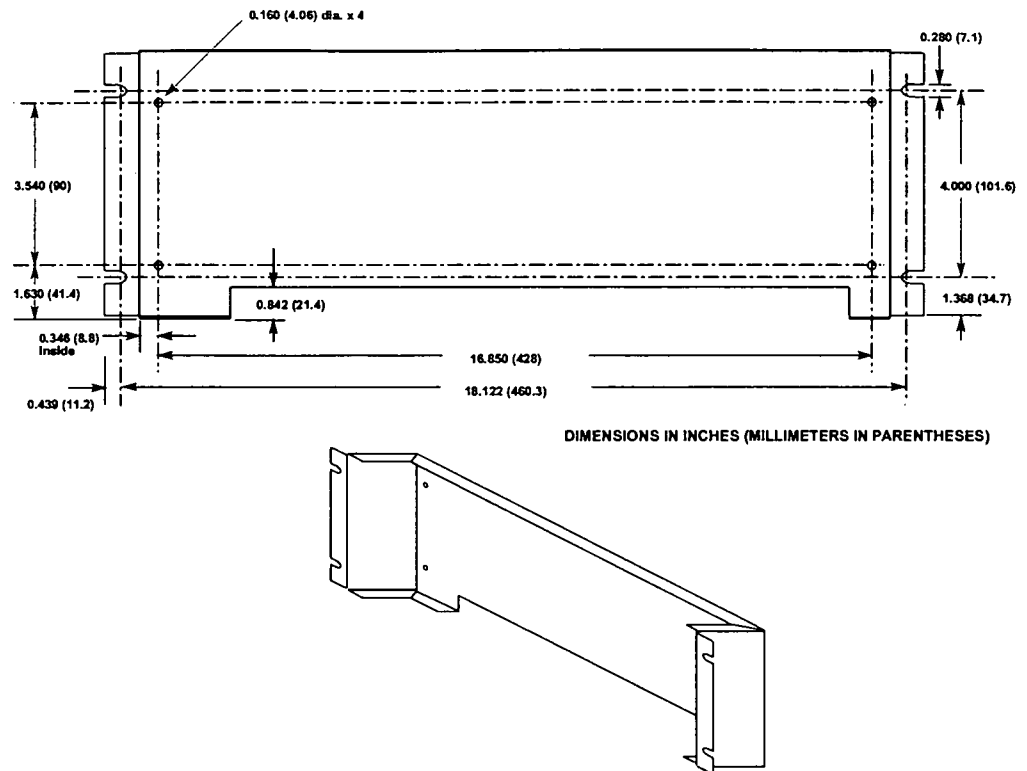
IC693ACC313 Recessed Mount Adapter Bracket
